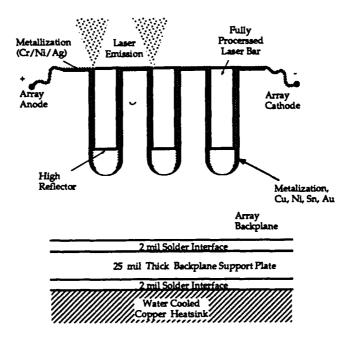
Schematic diagram illustrating a crossectional view the array assembly with a grooved BeO substrate. These devices require the use of soft solders and corrosive flux.
